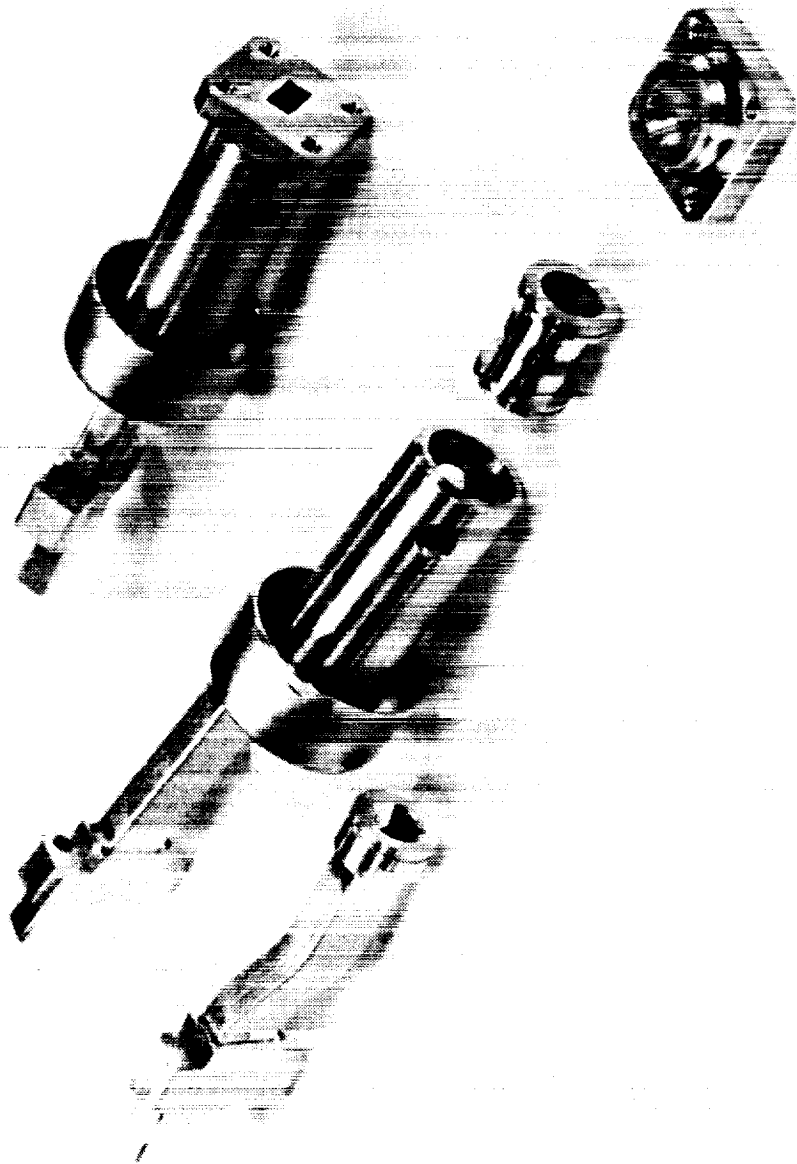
WAVEGUIDE ASSEMBLY FOR S/N 103
